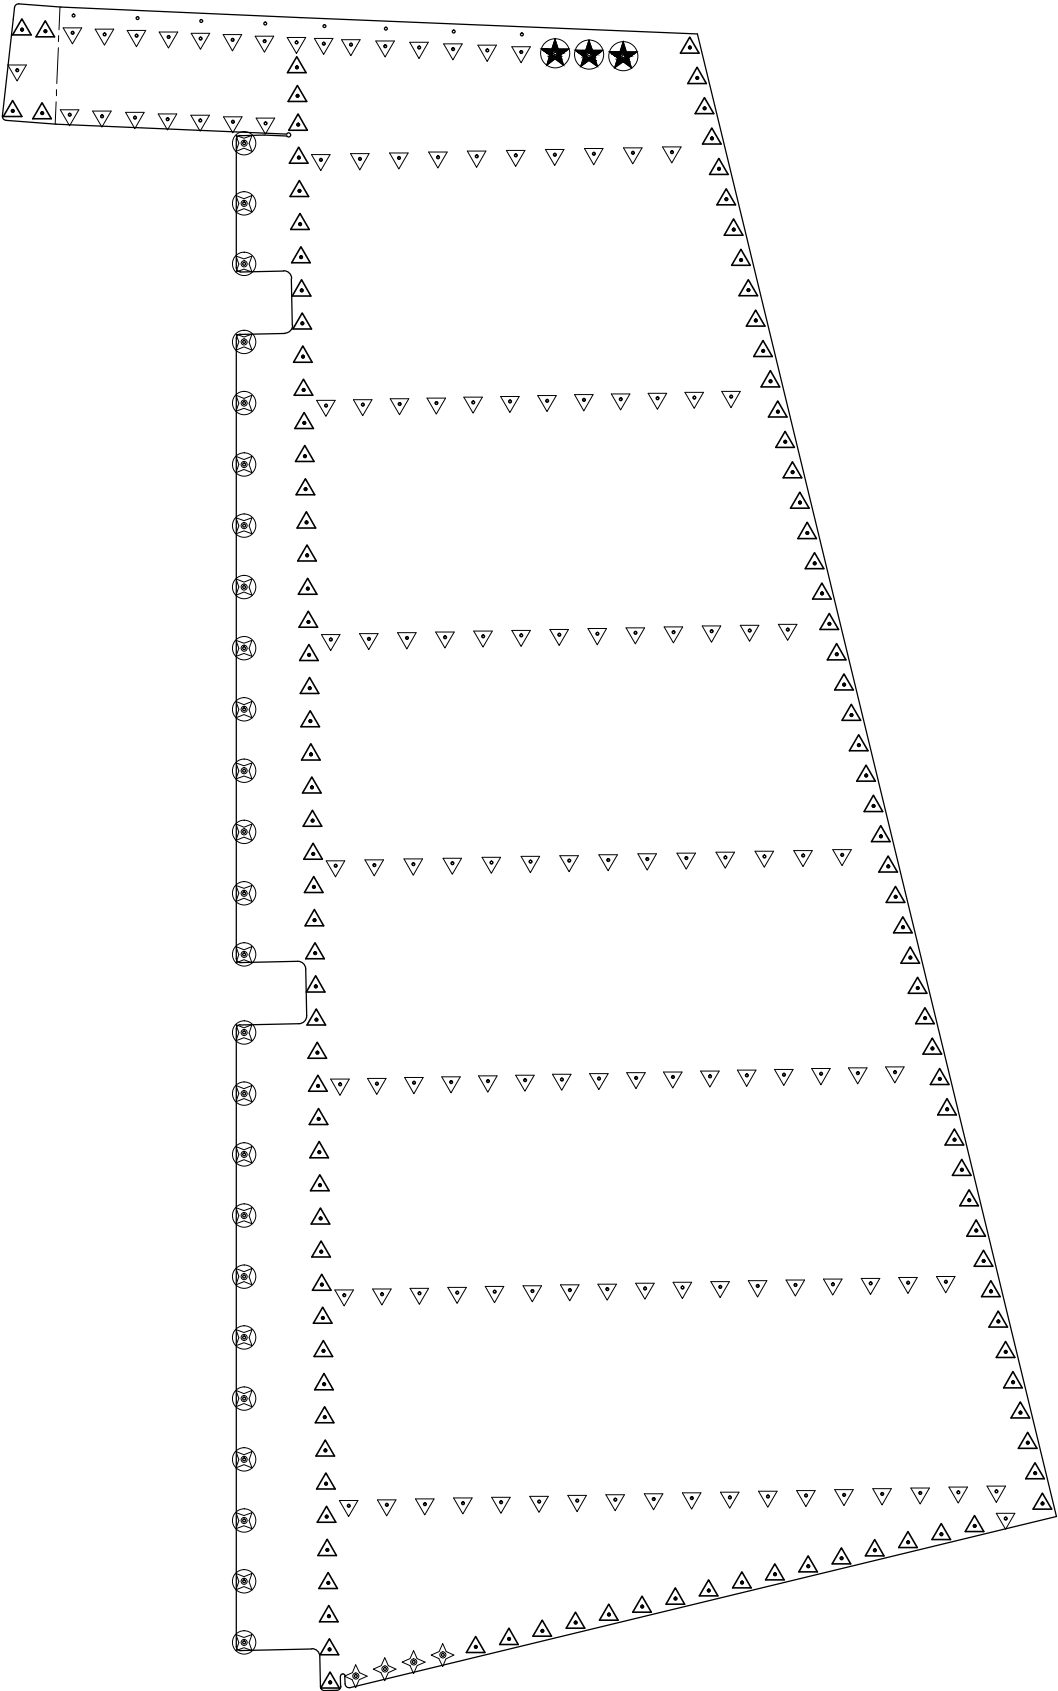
RUDDER SKIN RIVETS (SHOWN FLAT)
